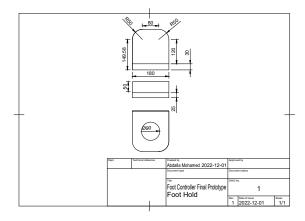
Foot Controller Final Prototype Foot Hold Technical Drawing
